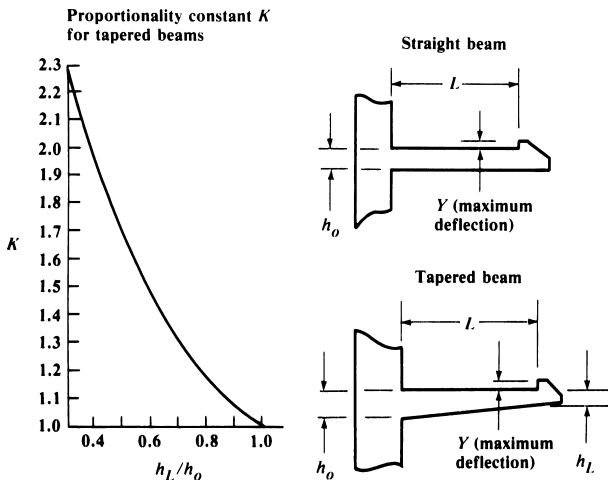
Snap-fit Designs for Cantilever Beams with Rectangular Cross Sections
